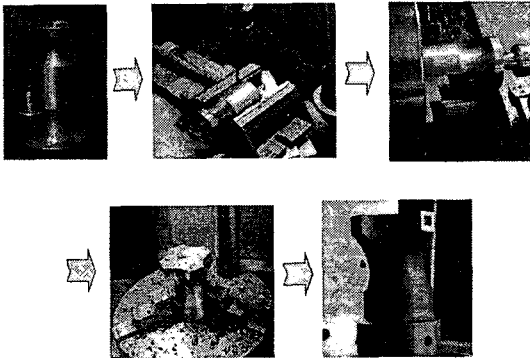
Manufacturing of ultrasonic welding horn (Ti)
